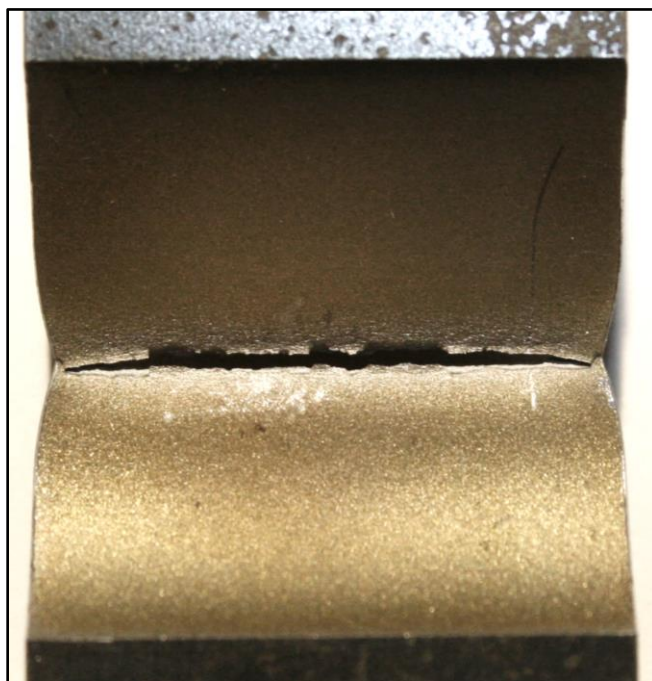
Thick Large Notched Specimen: Macro View of Typical Complete Failure
